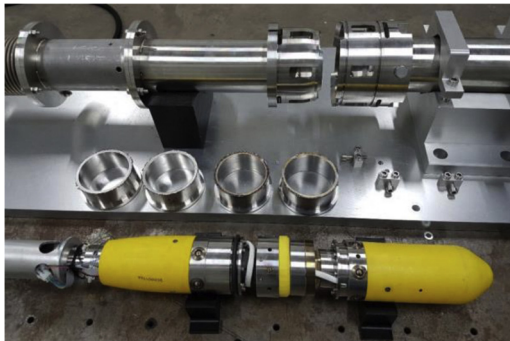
PoP cutting tool and cut 316 L and P91 samples.
